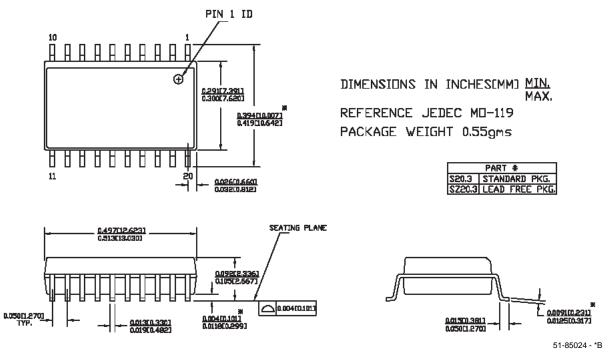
20-Lead (300-Mil) Molded SOIC
